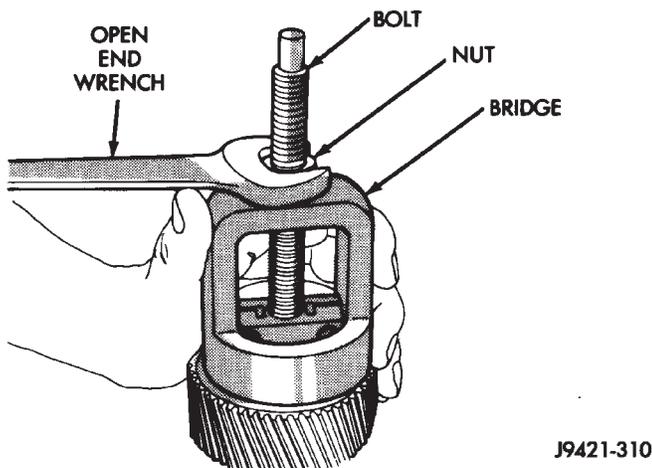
Removing Mainshaft Pilot Bearing From Input Gear
